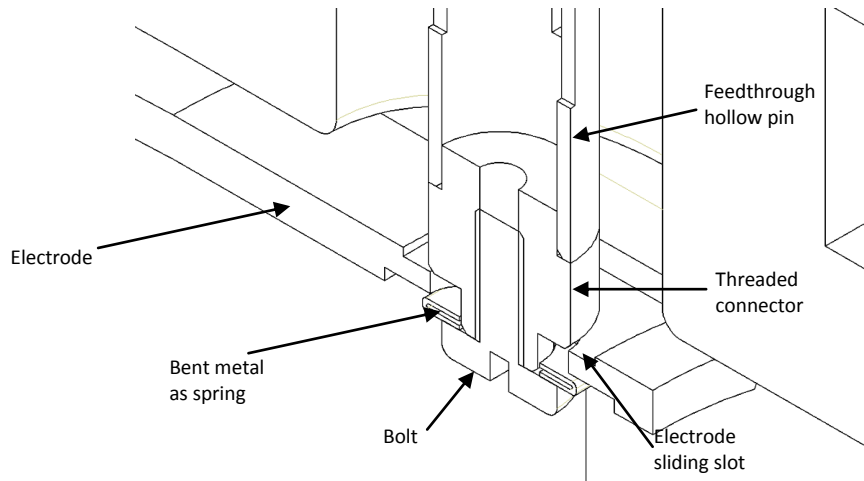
Sliding contact for DAΦNE strip-line kicker [5]
